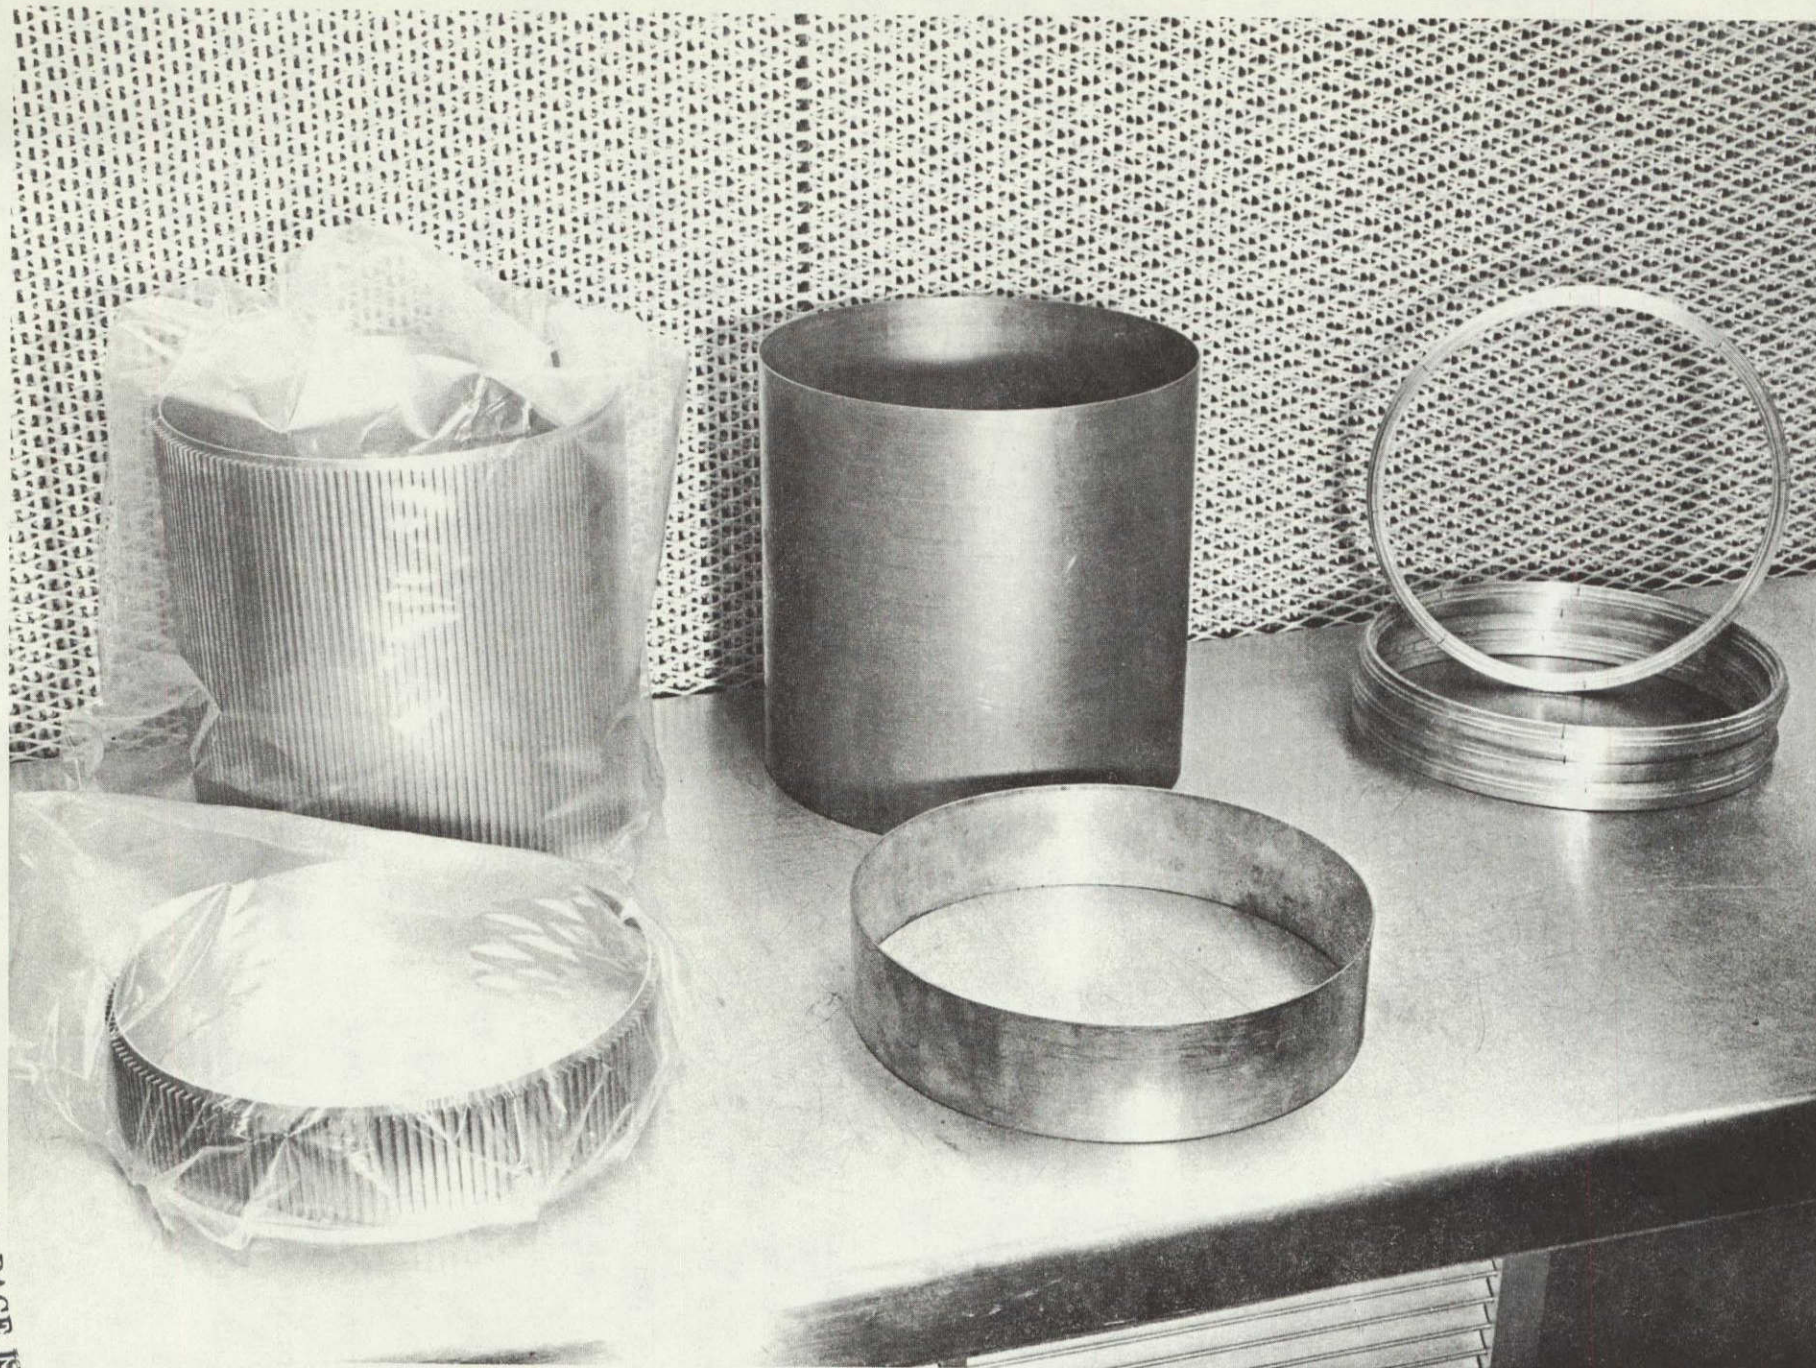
Diffusion Welding trial parts awaiting assembly.
